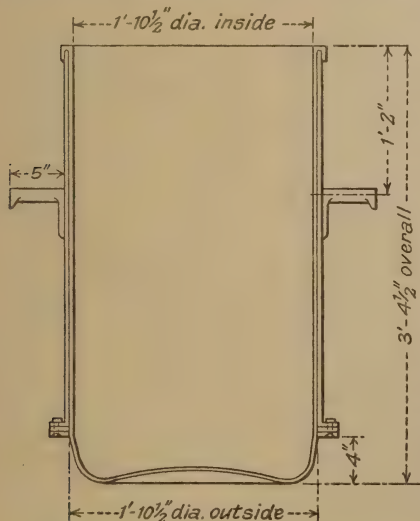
A.—STANDARD 60-LB. ALUMINIUM GUM POT, SHOWING DIMENSIONS.
